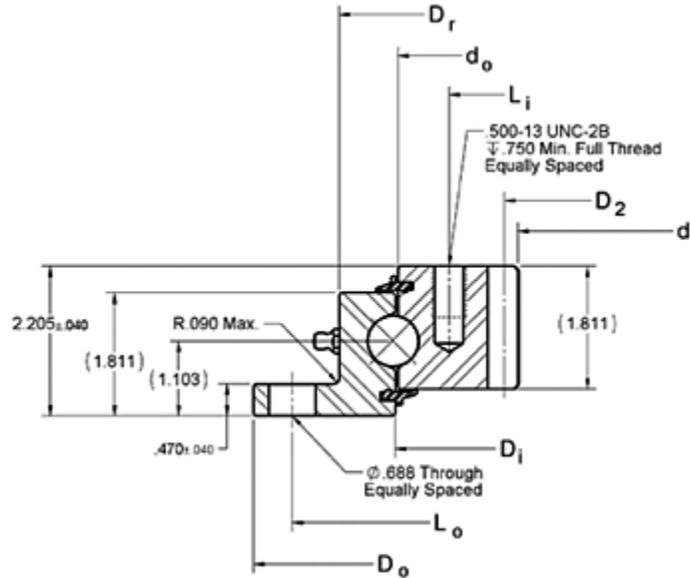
Kaydon Slewing Ring Bearing Dimensions.
